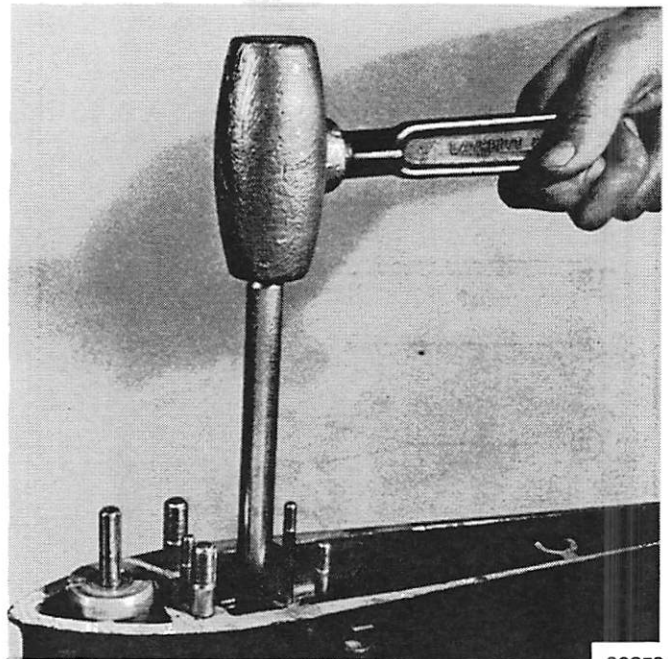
Removing Drive Shaft Needle Bearing from Gear Housing
